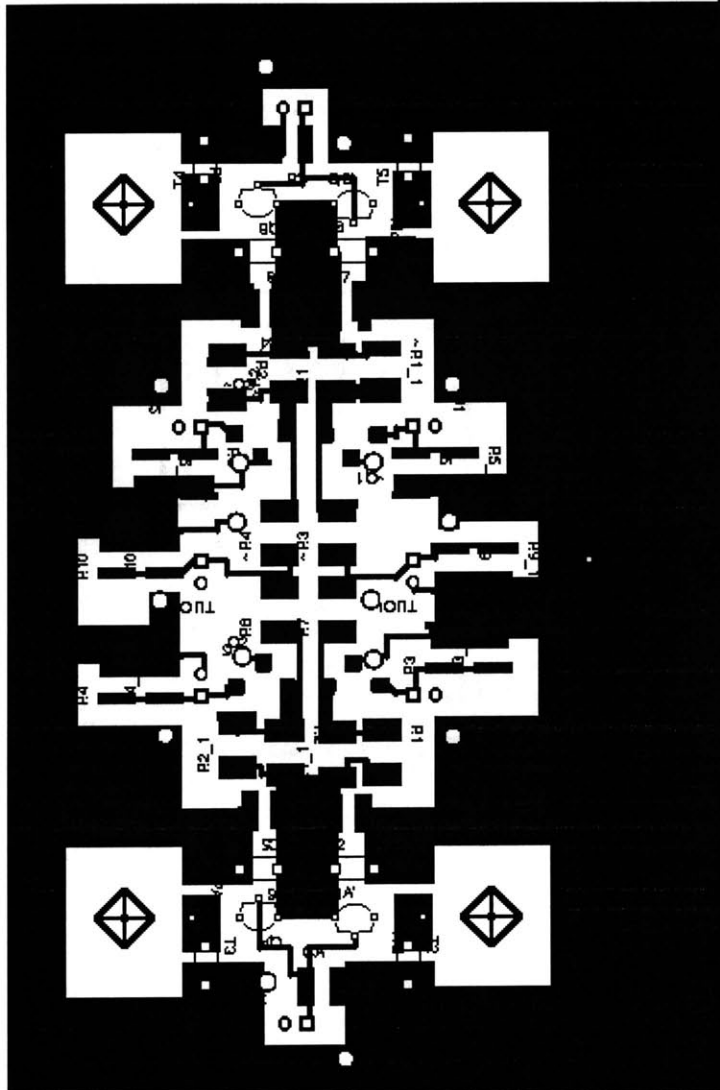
Schematic for the printed circuit board of the pulse shaper.
